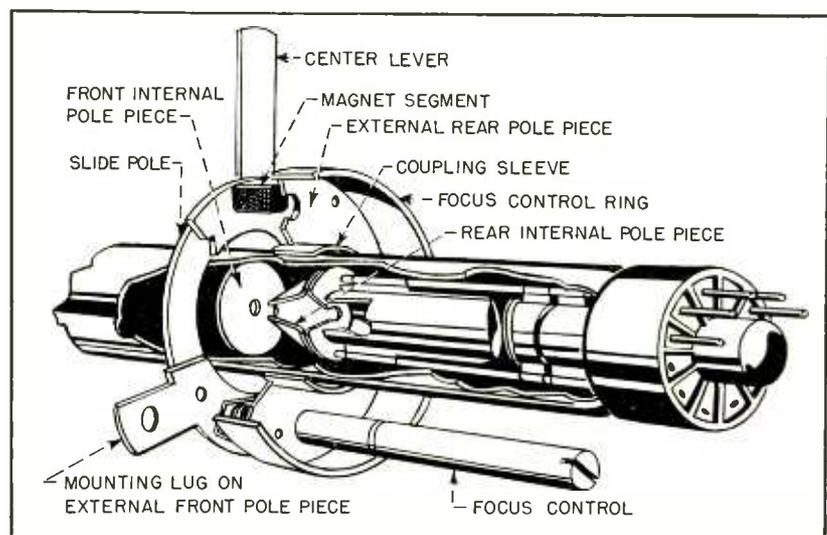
Drawing shows typical positions of internal pole pieces and focus unit mounted externally on neck of tube
